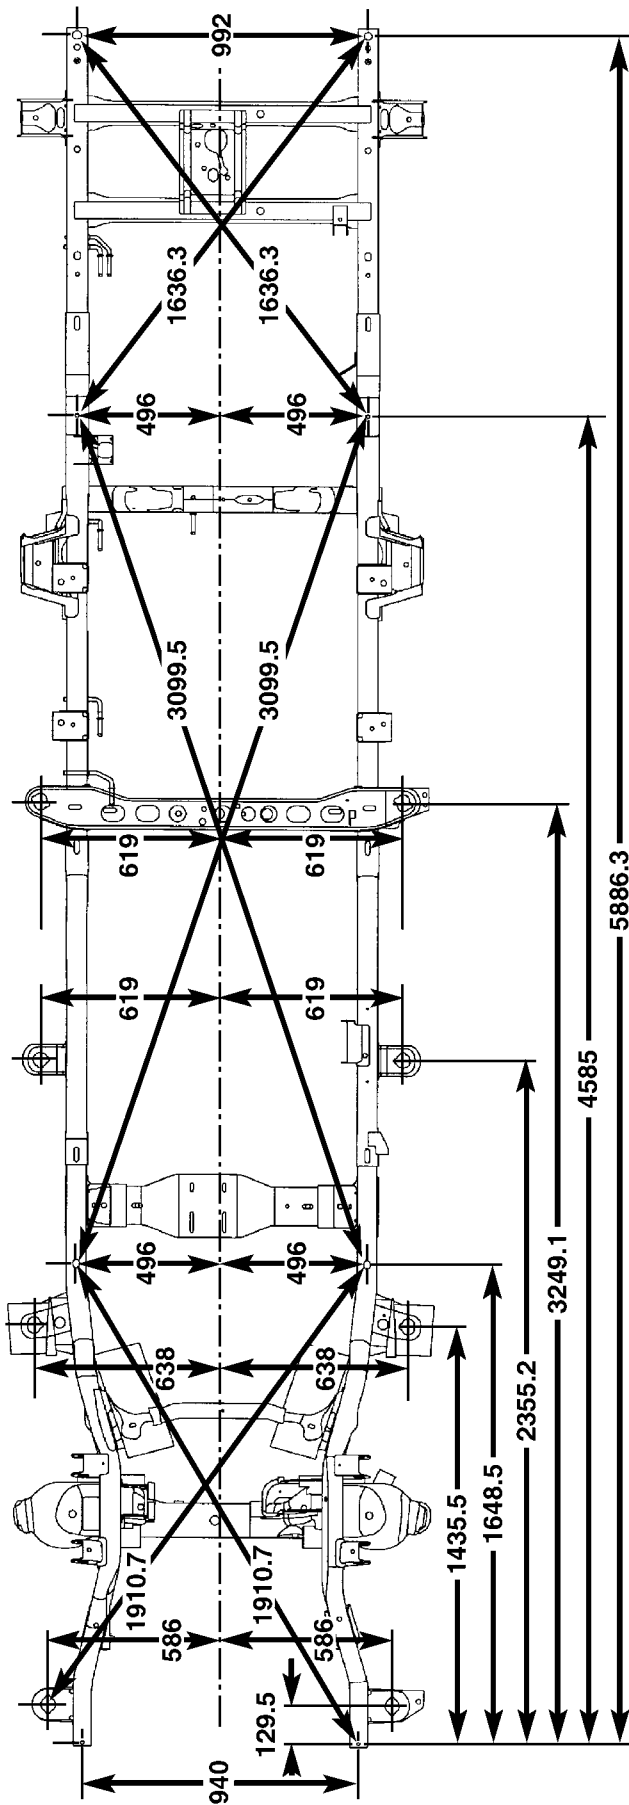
140.5 IN WHEELBASE - HEAVY DUTY - 4 WHEEL DRIVE
